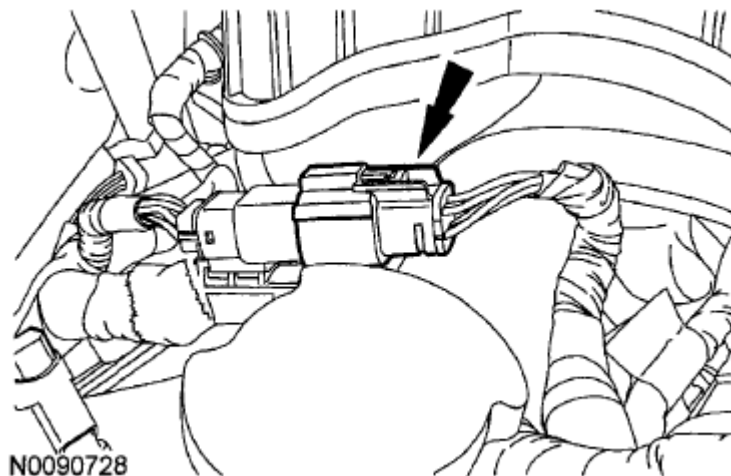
Locating Fuel Injector Wiring Harness Electrical Connector
